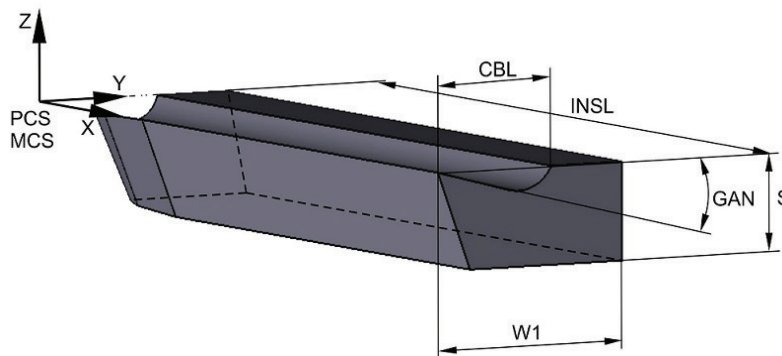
Chip breaker geometry of a reaming insert with one cutting edge and double plug chamfer
